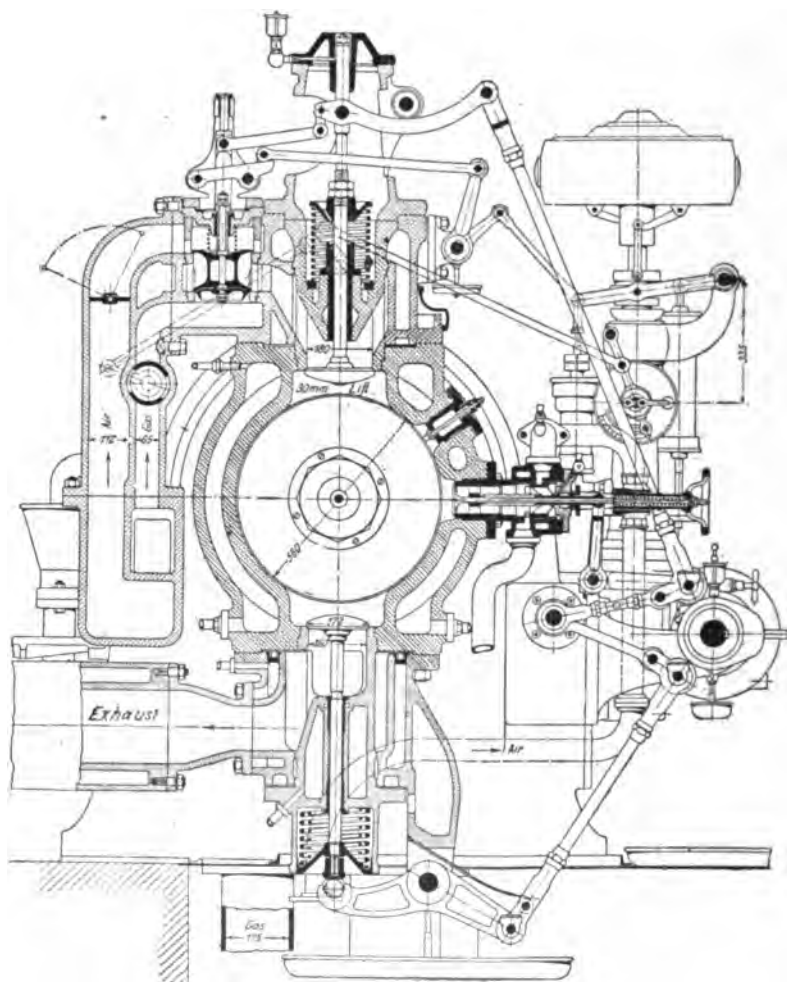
Valve Gear Details, 250 B. H. P. Deutz Engine.
